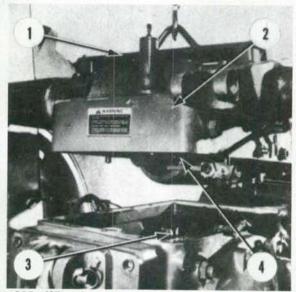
When installing hydraulic lift cover, be sure that roller (4) engages draft sensing yoke (3).
